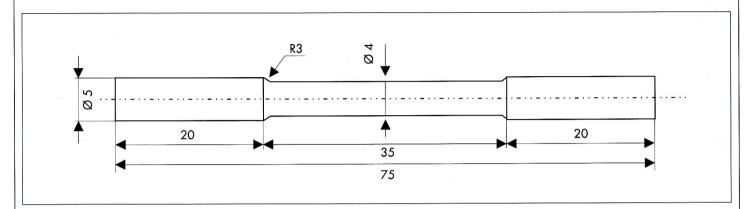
Geometry and dimensions (in millimetres) of the tensile test specimen \
